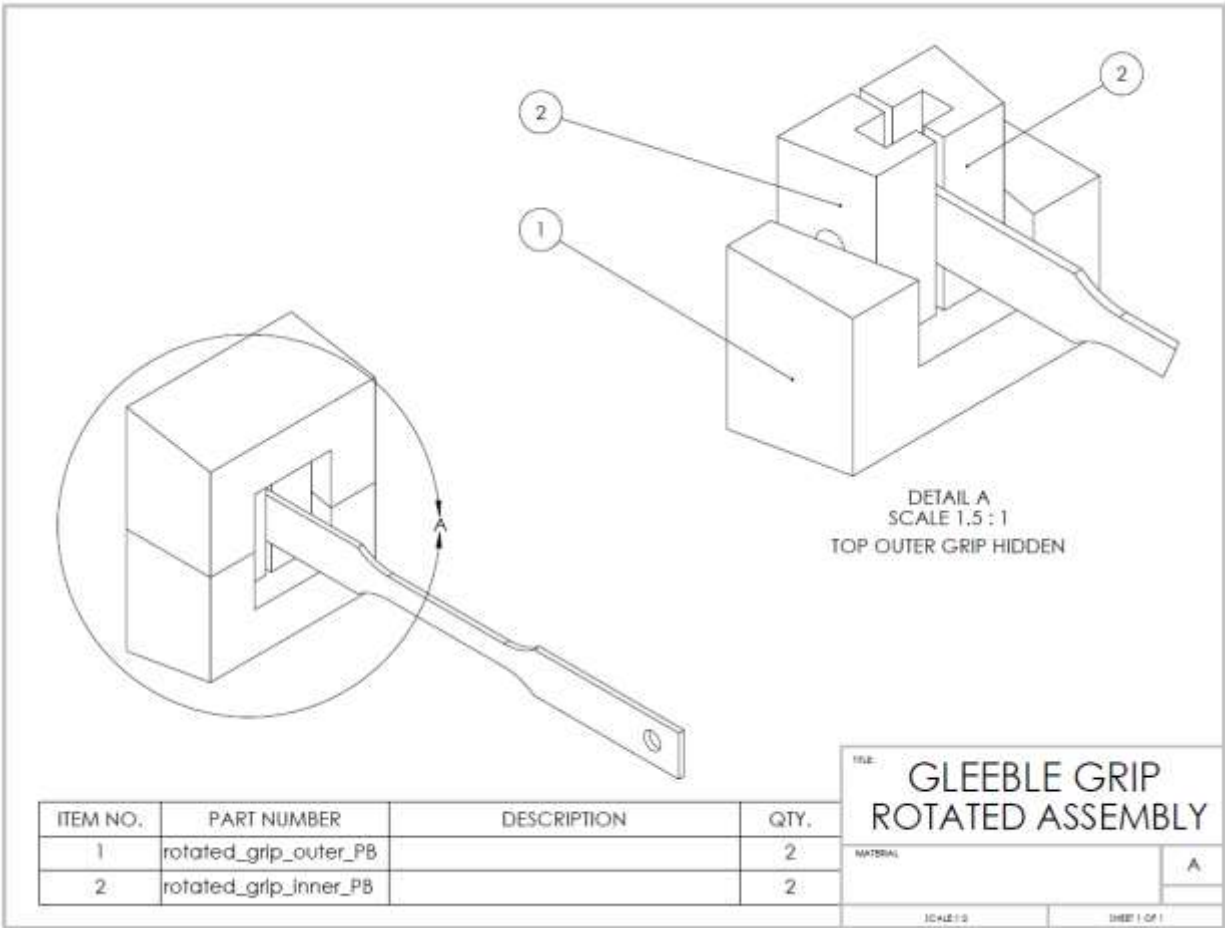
Assembly drawing of the grips for rotating the orientation of the specimen, the required dowel pin is not shown
